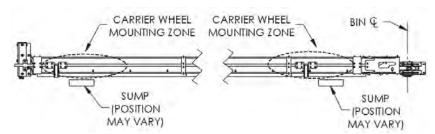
Rear carrier wheel mounting zones in bin ≥ 24' dia.
